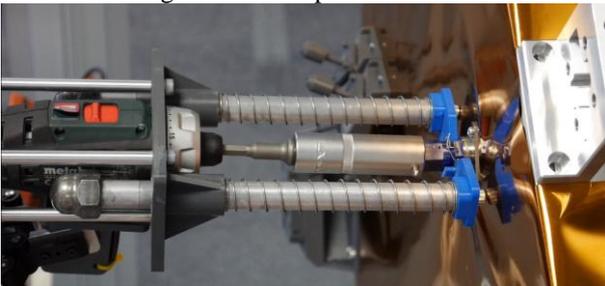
The cap removal in operation. The guiding frame has contact with the valve, and the nut of the screwdriver is about to glide over the cap.
